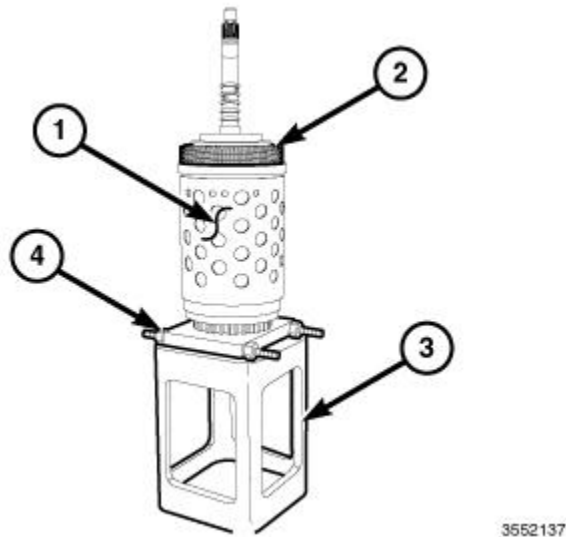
P4 Annulus Drum Assembly, Press Fixture Assembly & Bearing/Gear Splitter
